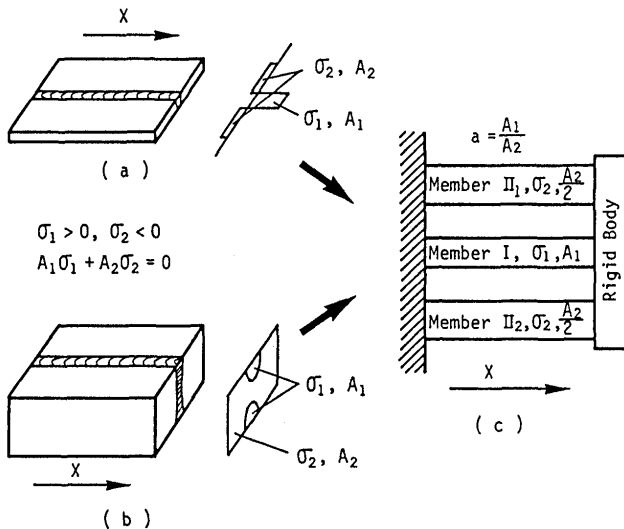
Idealized mechanical model of butt welded joint
